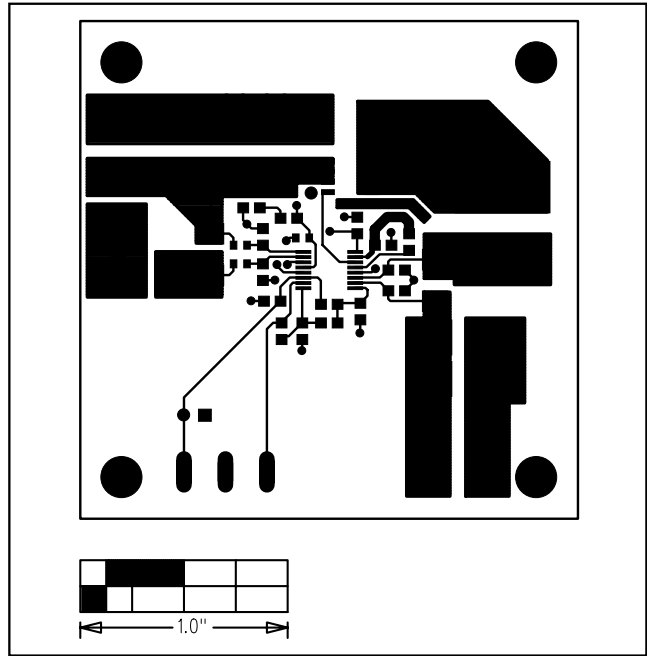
MAX1873 EV Kit PC Board Layout—Component Side
